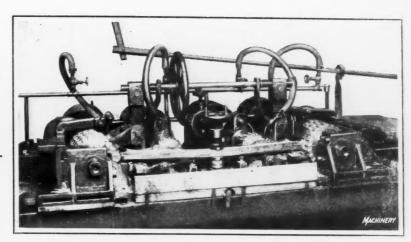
Four-spindle Milling Machine equipped for milling Two Spring Pads and Eight Yoke Faces on the Front Axle Forging
